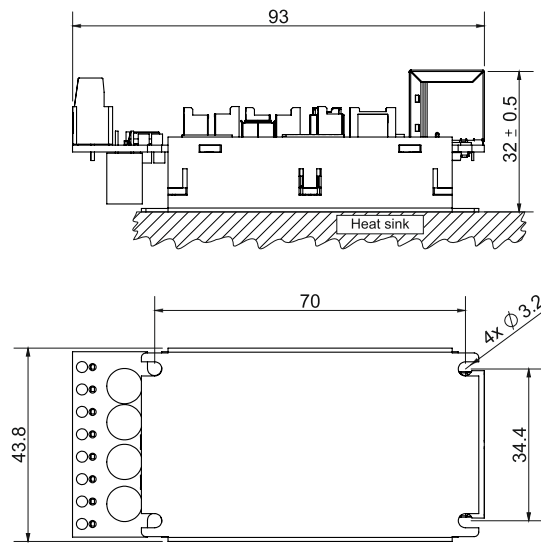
iPOS481x XZ-CAT drive dimensions
